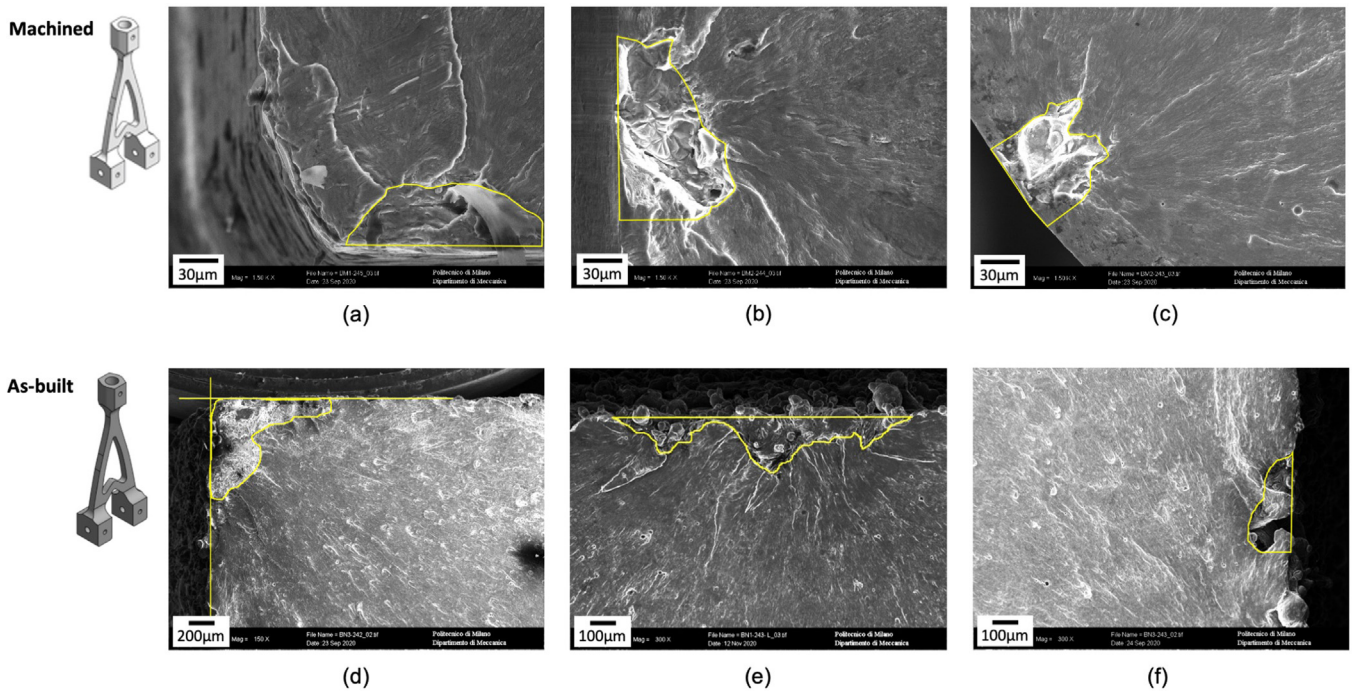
Defects detected on the fracture surfaces of M and AB benchmark components.
